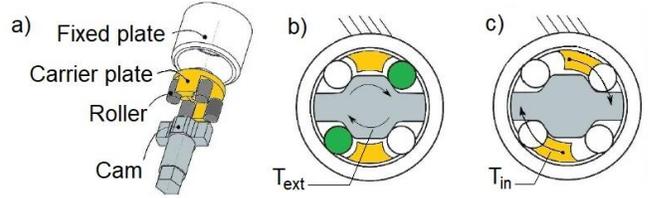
Overview of the previous design of the NBDM of the *S-Finger*: A) exploded view. B) NBDM in its locked condition, cross section. The cam is forced from the output shaft (cam, gray) by an external torque T_{ext} resulting in wedged rollers (green) preventing the rotation of the cam. C) NBDM in its unlocked condition, cross section. When the motor is driven, the torque T_{in} is transferred to the carrier plate (yellow) unlocking the rollers. (Adapted from [3]).
